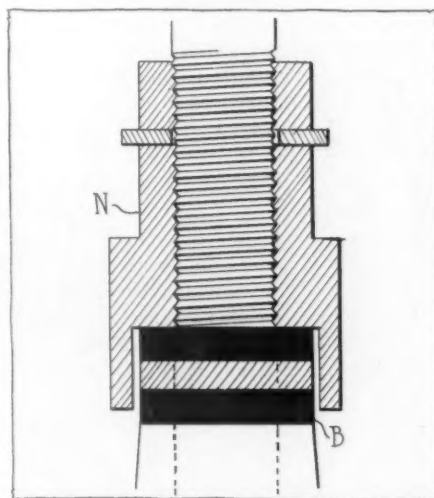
LOCKING ARRANGEMENT THAT CAUSED TROUBLE
